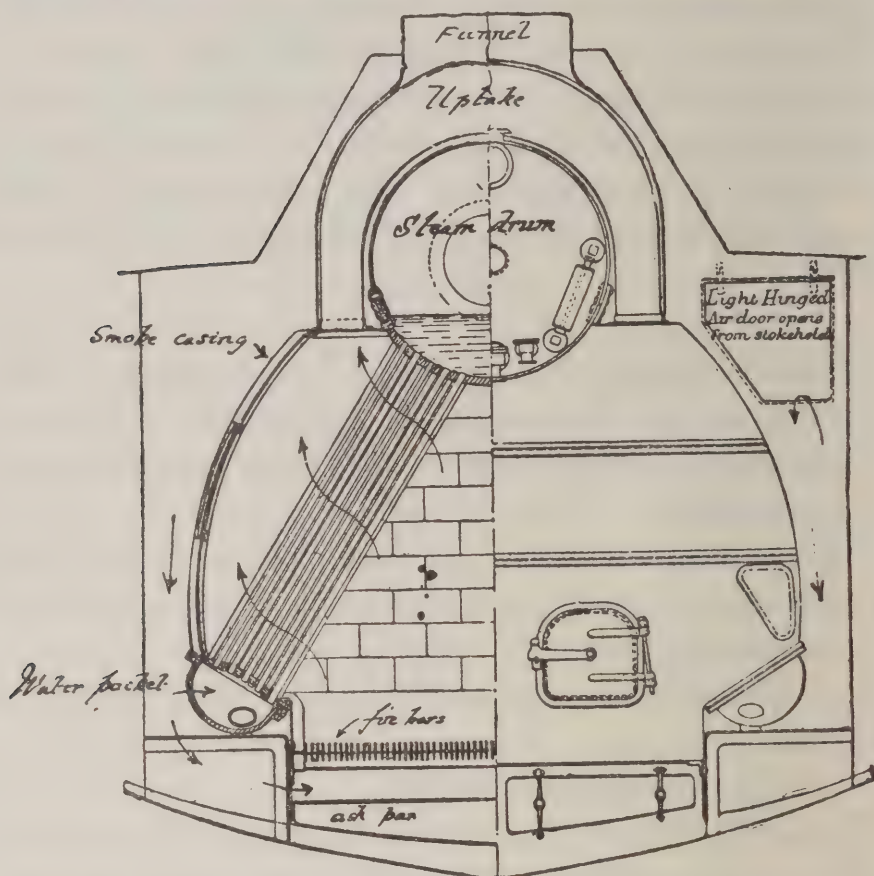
FIG. A.—YARROW BOILER—END ELEVATION (HALF CASING REMOVED).
